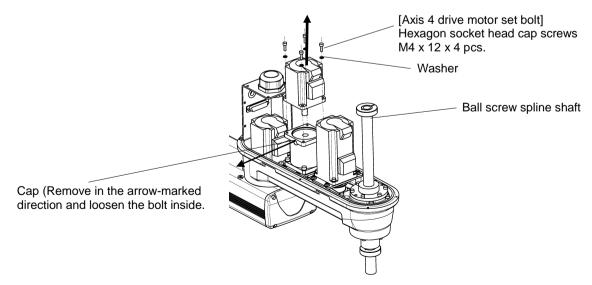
Dismounting axis 4 motor (KHL-500, KHL-600, KHL-700)
